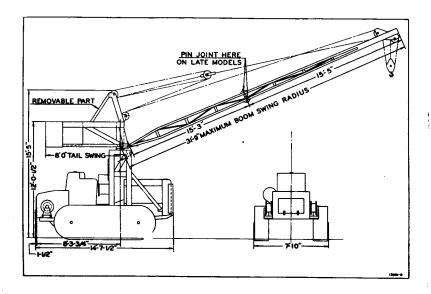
Overall Dimensions of Crane Mounted on Tractor
